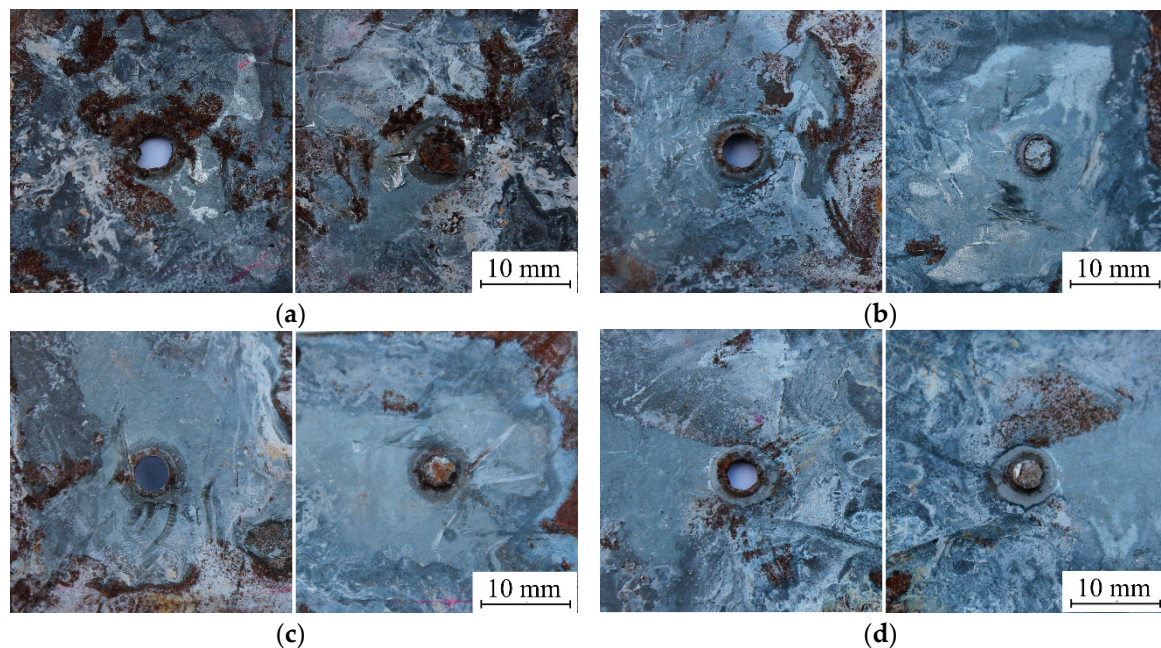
Surfaces of the spot welds at the internal sheet interface side after an exposure time of 500 h to a salt spray environment. Samples (a) no. 1; (b) no. 2; (c) no. 3; and (d) no. 4.
